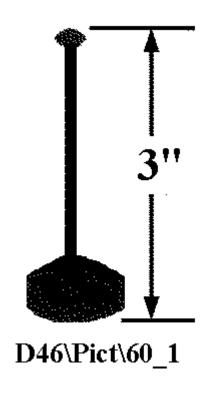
46-0060-001 Antenna dimensions (For Reference Only)
